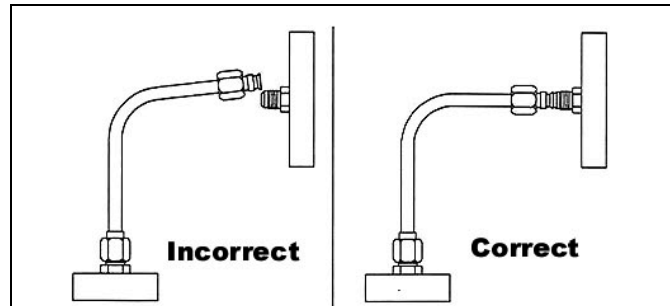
Check for proper component alignment. Correct misalignment prior to final assembly. Align hose/tube assembly allowing hand connection. To assure proper alignment, two to three turns of nut should be easily permitted by hand.
